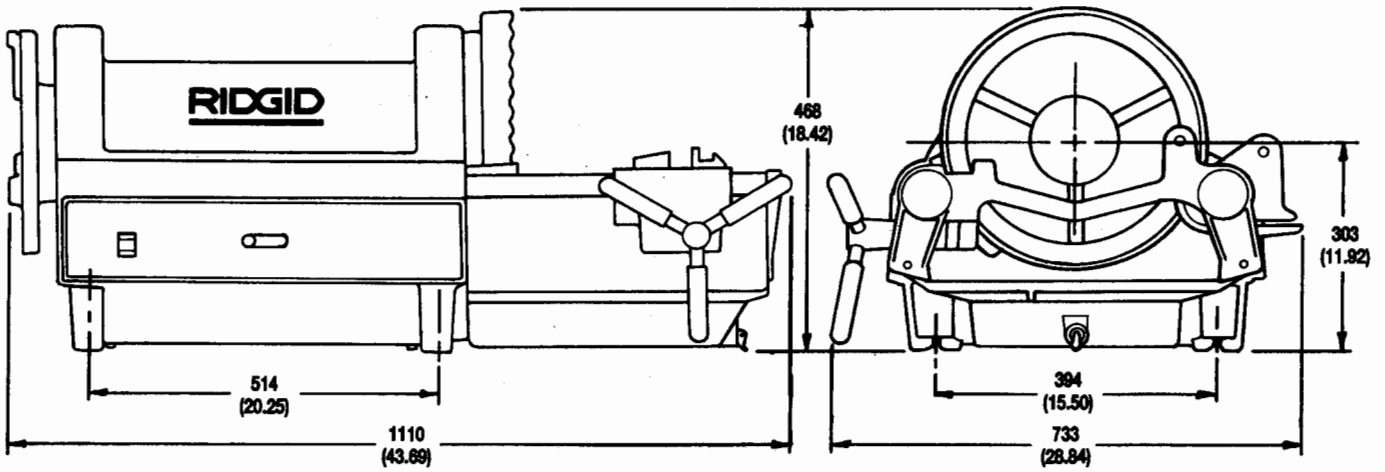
No. 1224 Machine dimensions - mm (inches)
